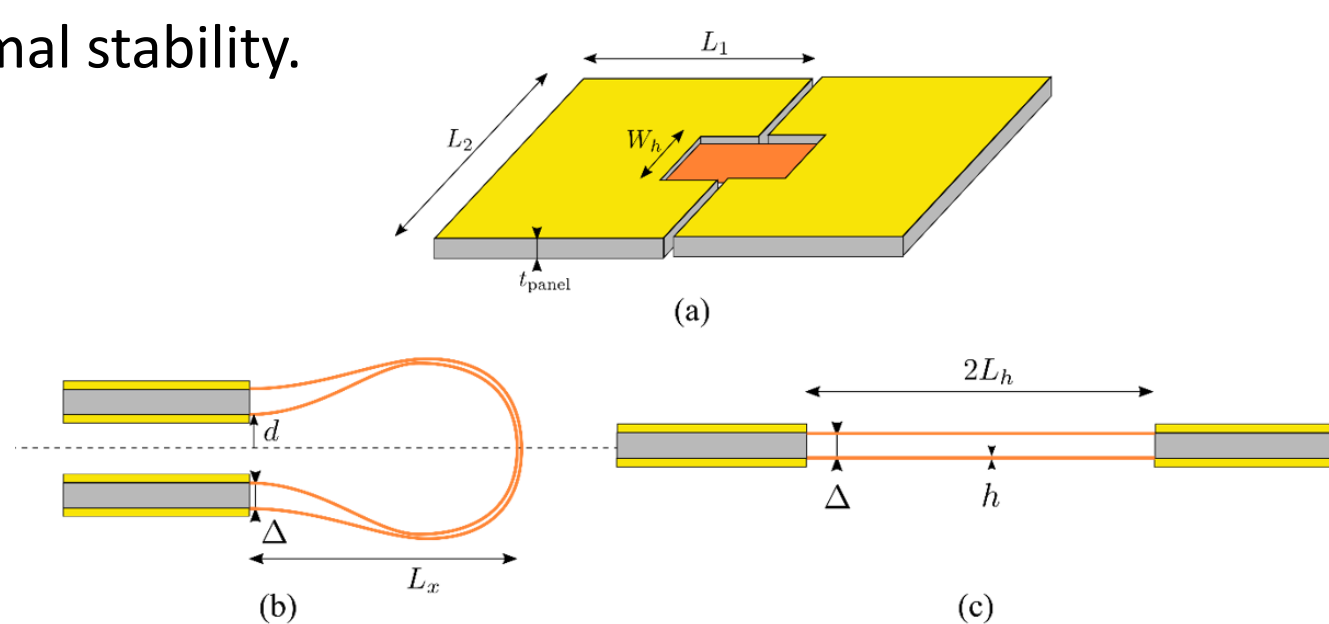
Proposed hinge architecture (a) isometric view with the dimensions (b) hinge when folded and (c) deployed.
